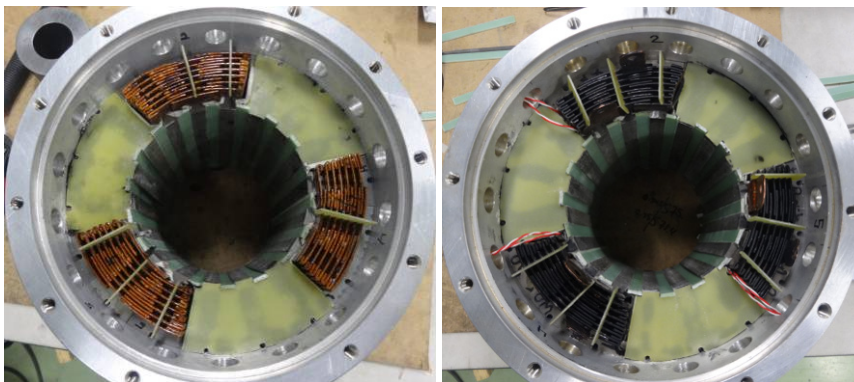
Drive end (DE) (left) and non drive end (NDE) of the prototype machine
